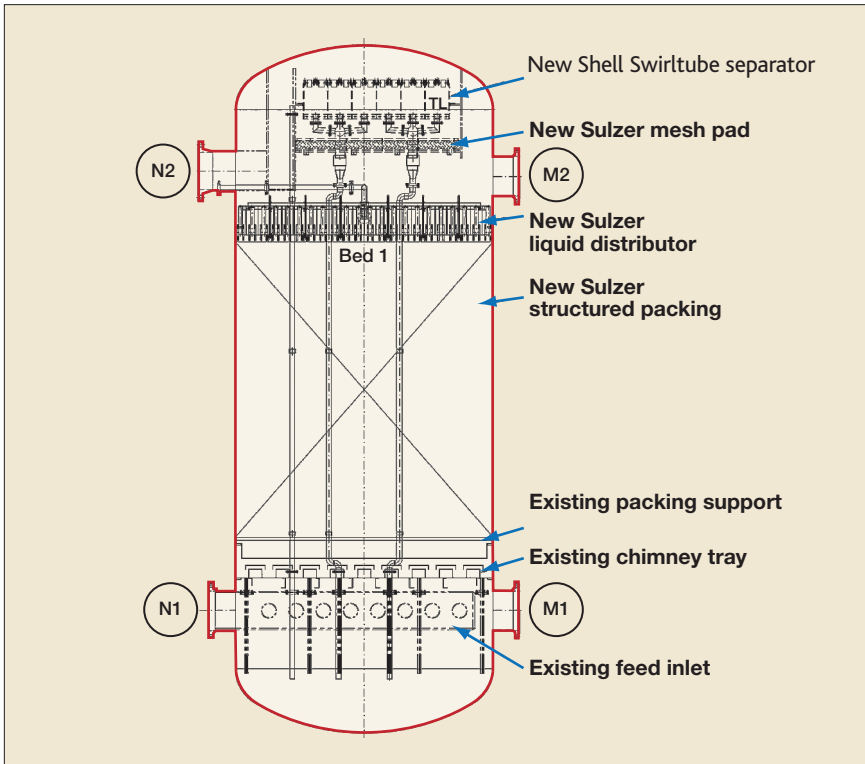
Proposed Sulzer KnitMesh coalescer and Shell Swirltube separator
